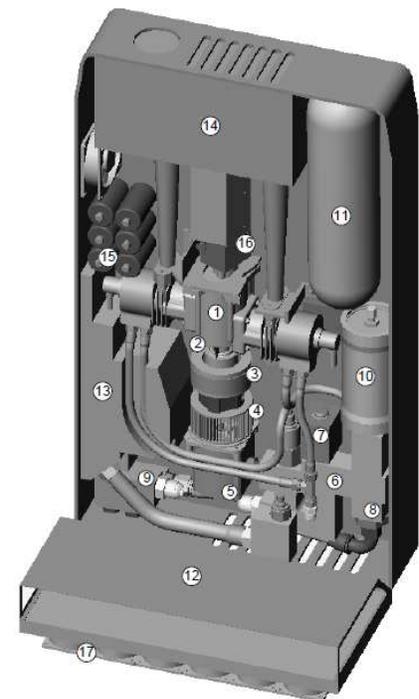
HEPU layout. Engine 1; shaft 2; alternator 3; cooling fan 4; gear pump 5; manifold 6; solenoid valve 7; filter 8; pressure transducer 9; accumulator 10; nitrogen tank 11; heat exchanger 12; hydraulic reservoir 13; muffler 14; batteries 15; carburetor an
